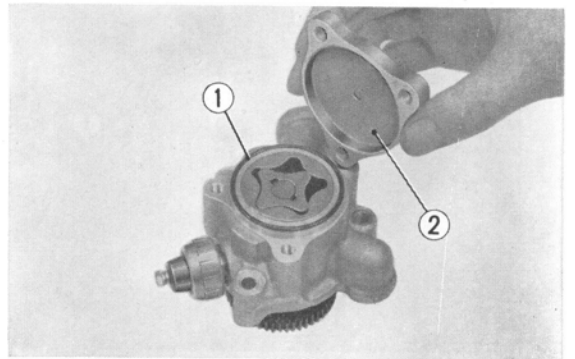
① 47 mm O-ring ② Oil pump cover
